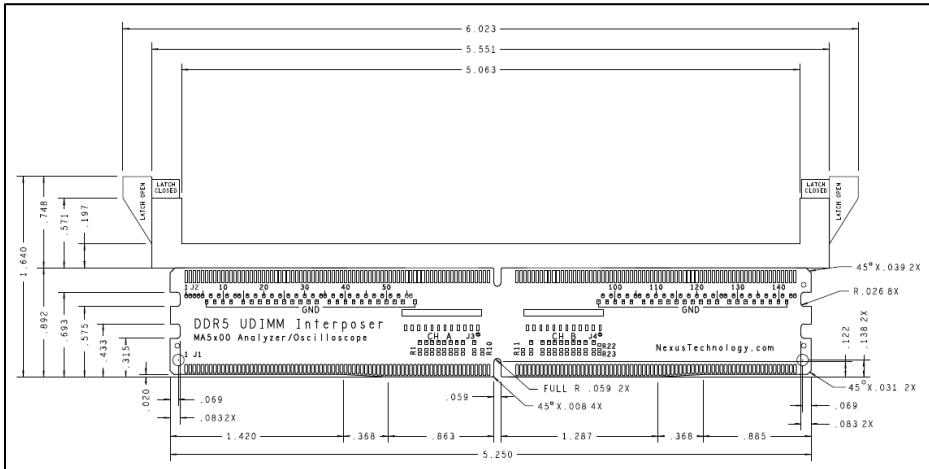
DDR5-A-UDM-288 - Dimensions Front
